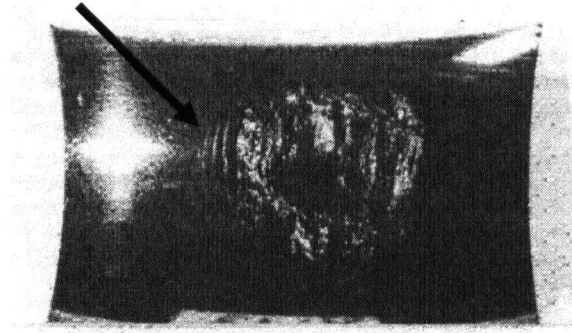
Surface fatigue type of wear on a ball bearing. Arrow pointing to bulges characteristic of surface fatigue failure (Burwell, 1979).
